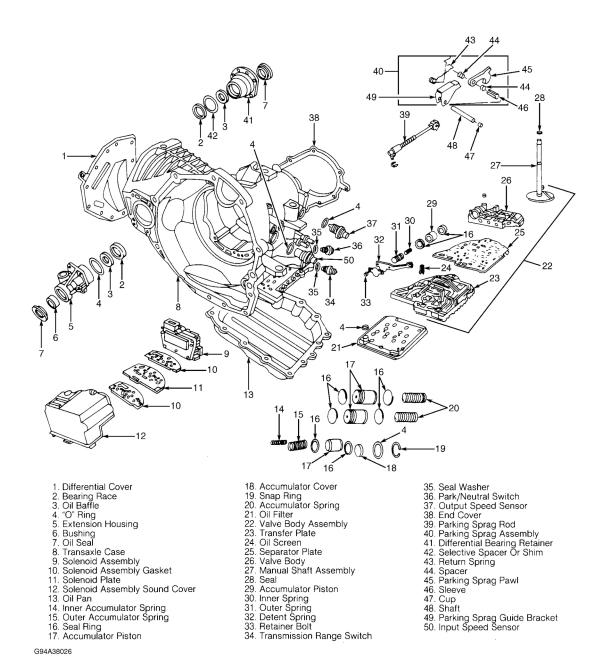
Exploded View Of Transaxle Case Courtesy of CHRYSLER CORP.
